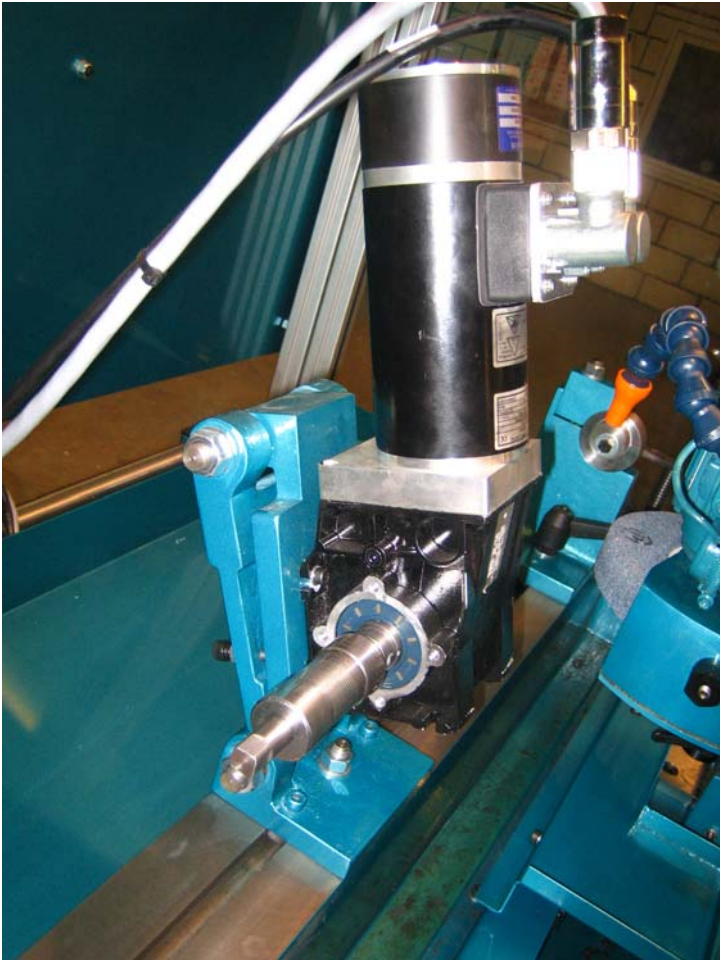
Spin motor with flexible coupling fitted to the left hand side
